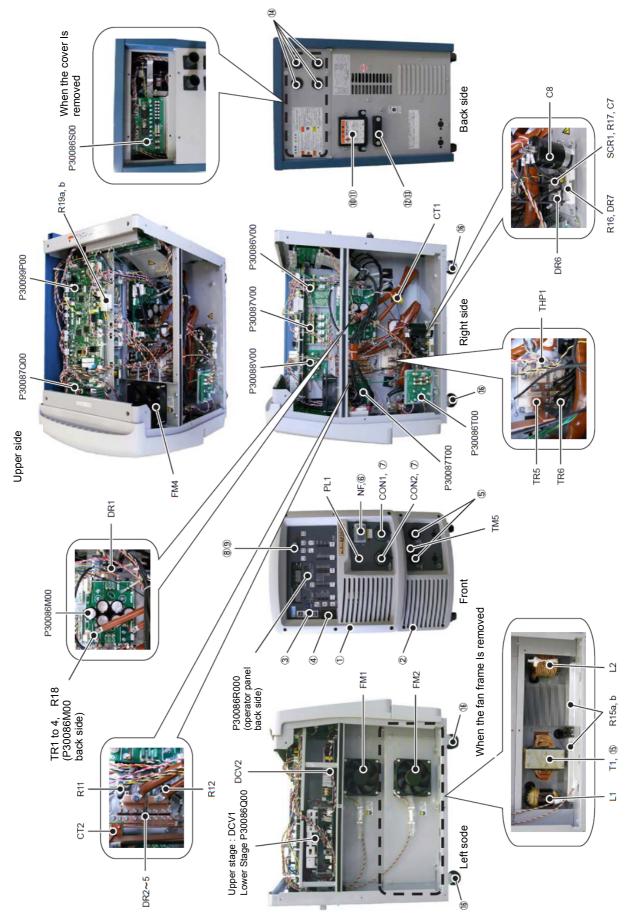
(c) Welding power supply WB-P350L $_{\rm -}~150$ -
